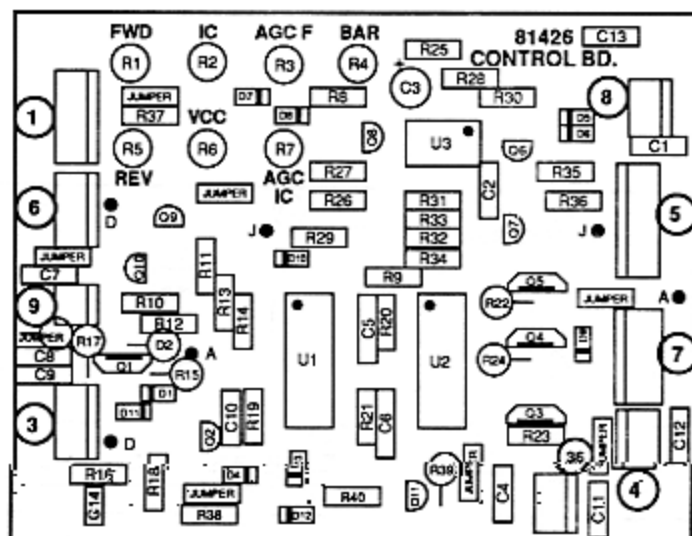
81426 CONTROL BOARD COMPONENT LAYOUT
